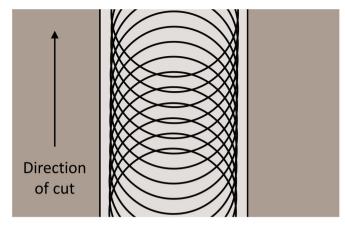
Path taken by milling cutter with tool starting and finishing clear of the work piece.
